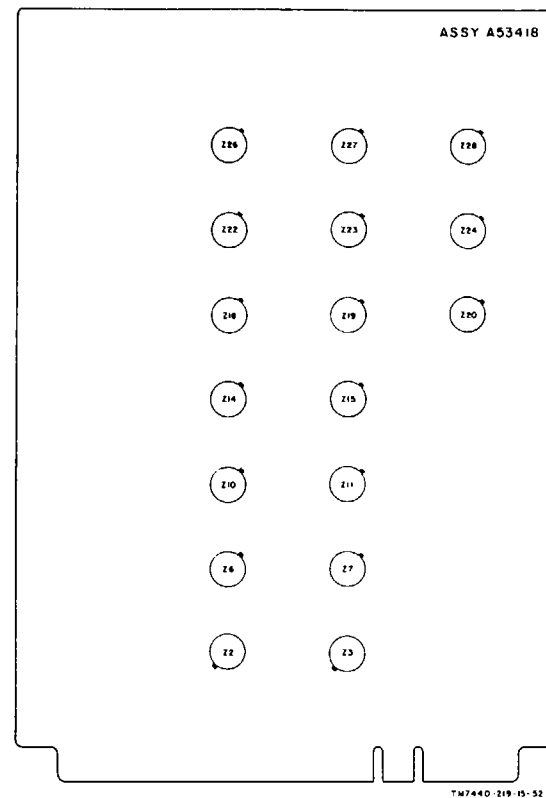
PC card No. A53A418 (A1A14), component location diagram.
